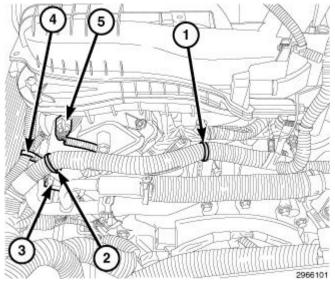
Engine Coolant Temperature (ECT) Sensor Connector, Camshaft Position (CMP) Sensor & Harness Retainers
